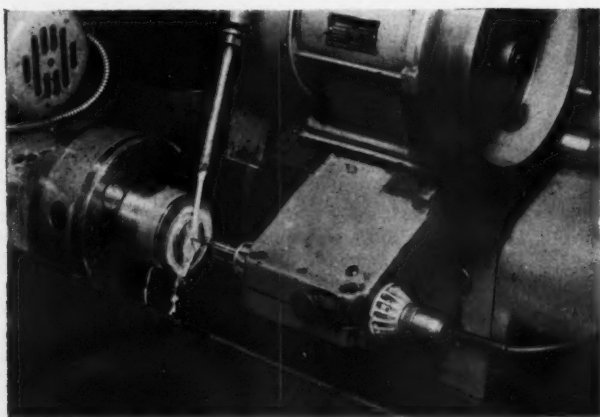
In this close-up view, an Oberg No. 17 high-frequency spindle unit is shown set-up for internal grinding with a tungsten carbide burr
